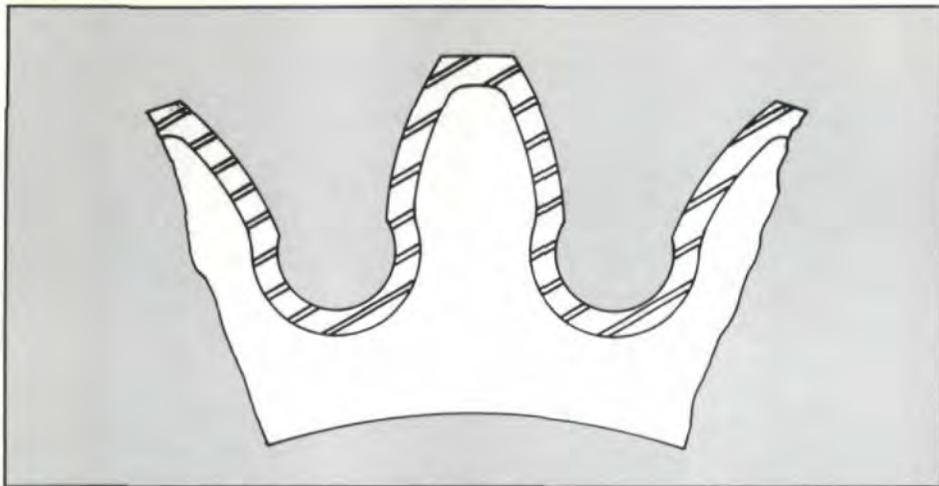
A—Protuberance cut full fillet improves case depth in fillet.
